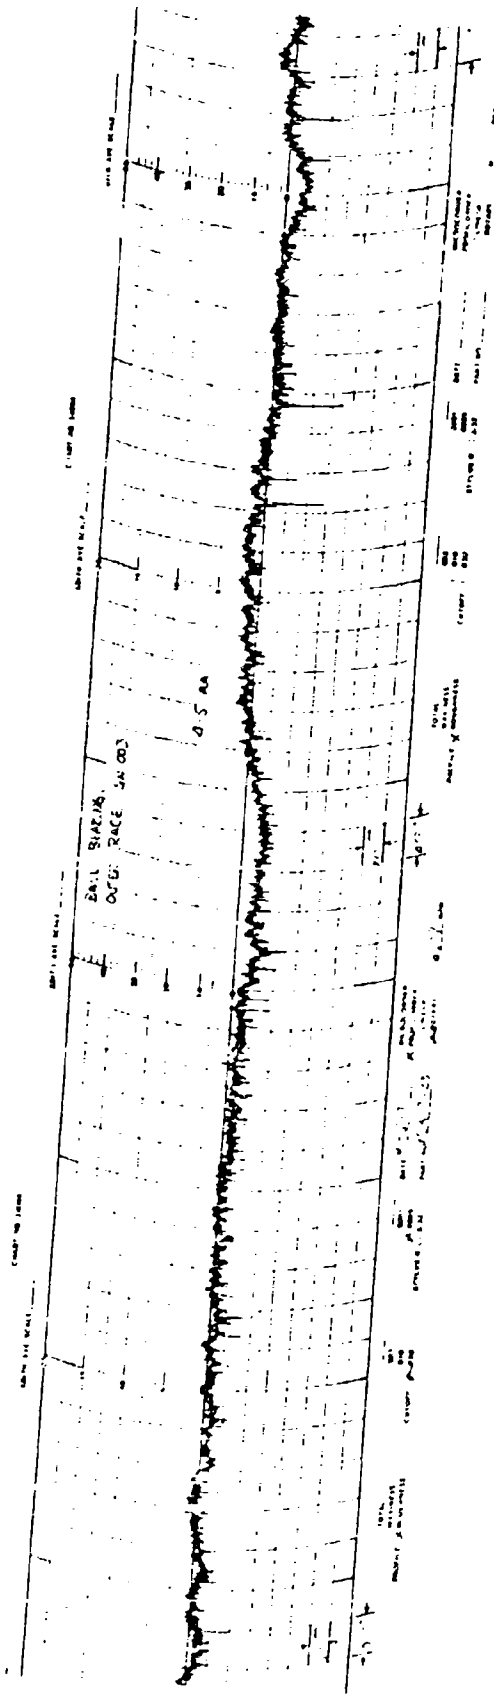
Ball Bearing S/N 003 Outer Race Surface Texture and Groove Radius.
